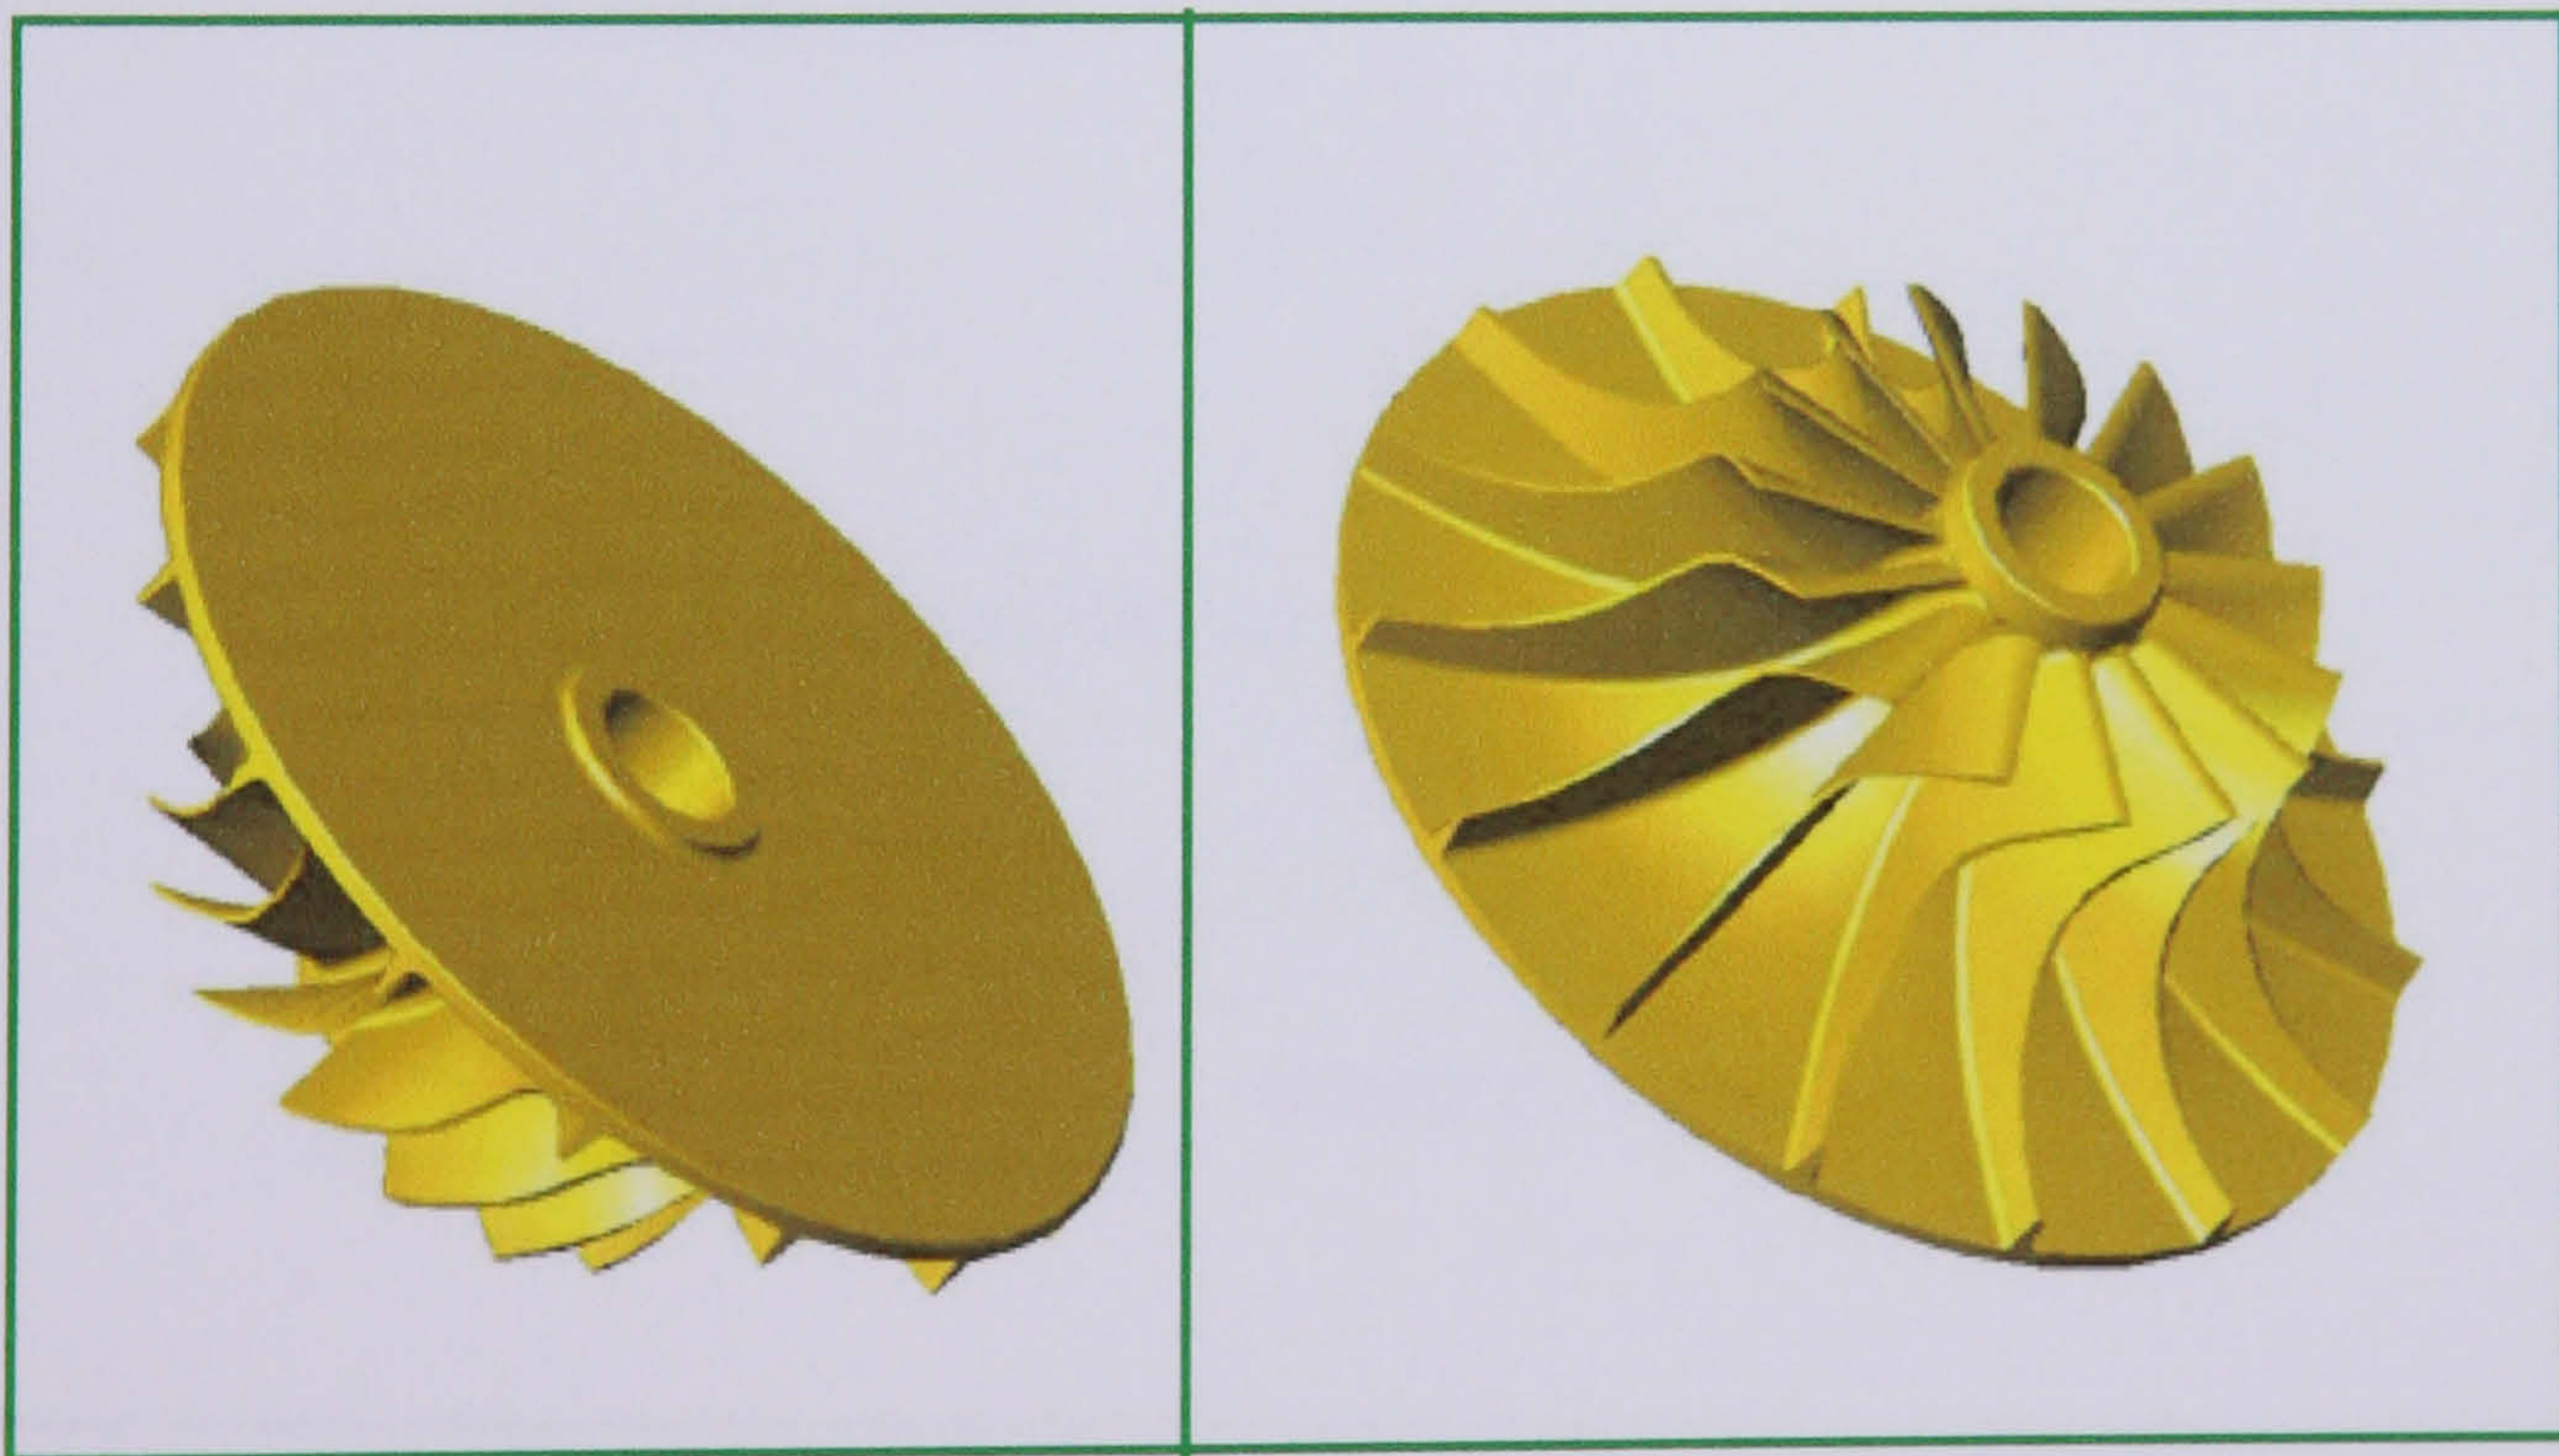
THREE-DIMENSIONAL SOLID MODEL OF THE IMPELLER
